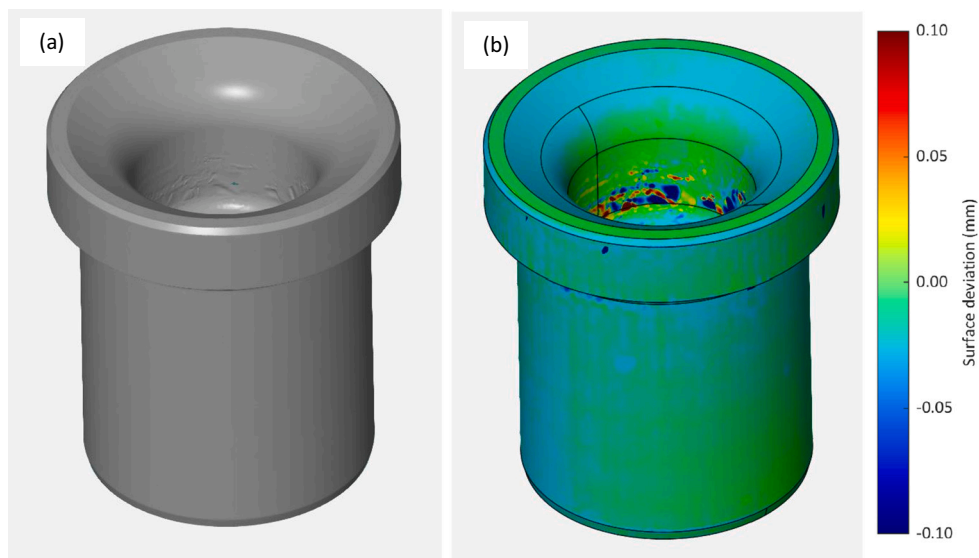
(a) Scan of final part geometry. (b) Surface deviation map.
